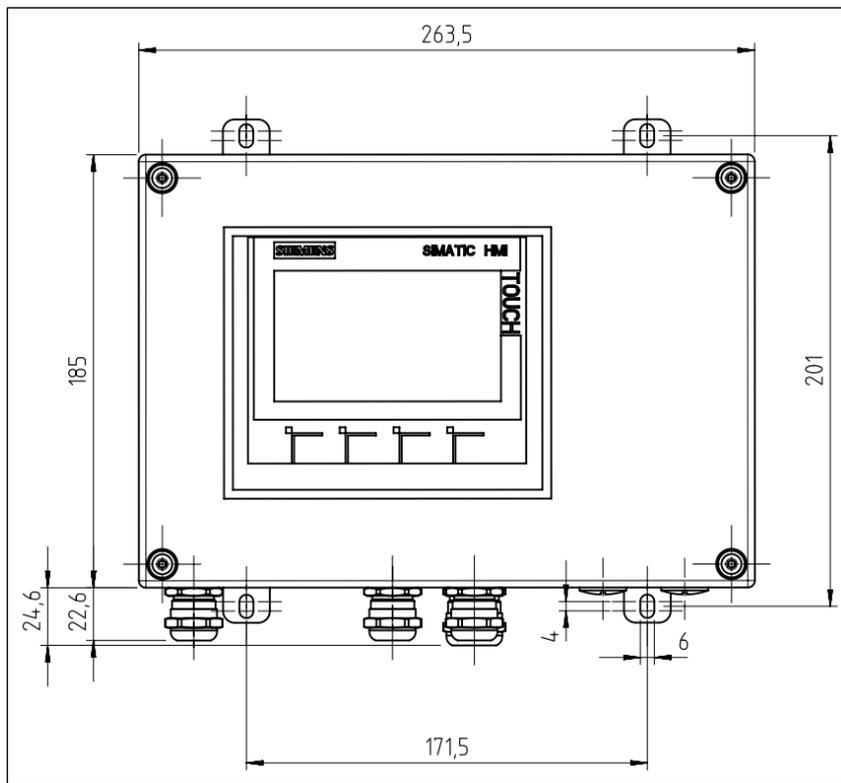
SIWAREX WT241 weighing terminal – dimensions and hole pattern
